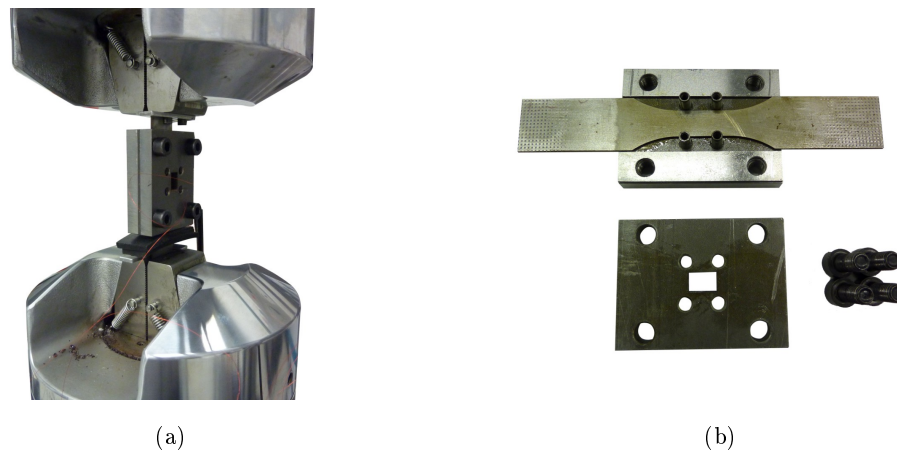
Experimental set-up used in tension-compression cyclic test to obtain the kinematic hardening behaviour: (a) test equipment; (b) special tool to avoid buckling.
